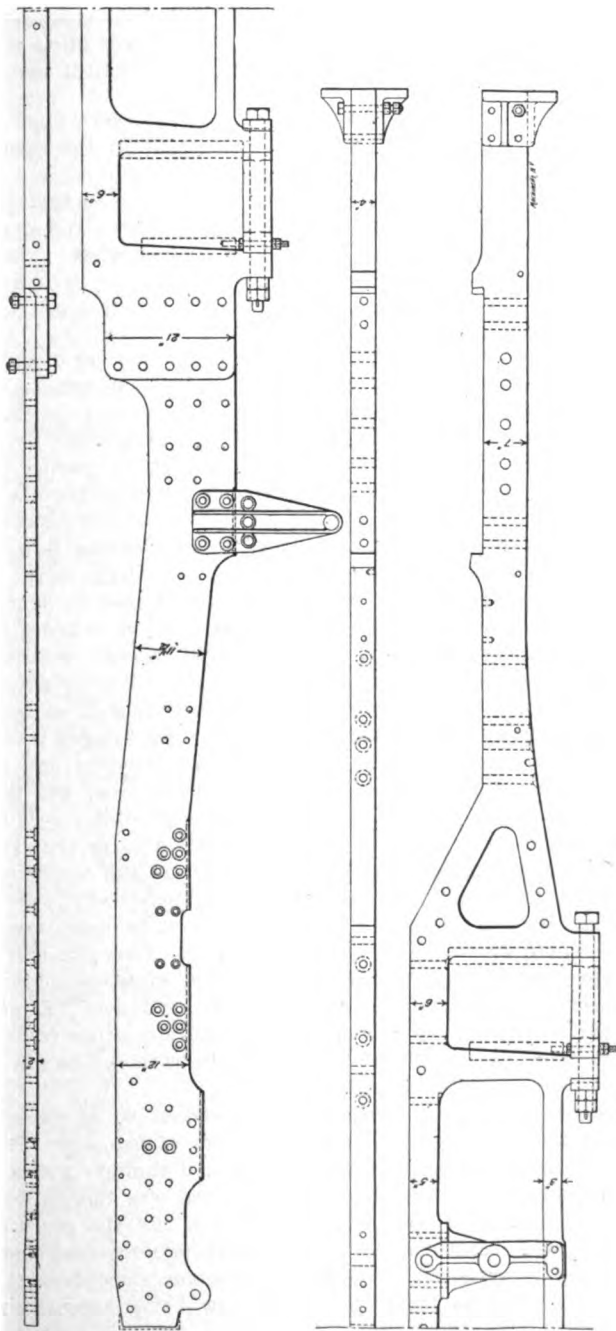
Frame for Atlantic Type Passenger Locomotive
